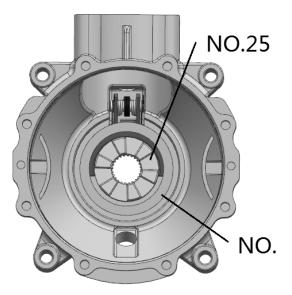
8.Install the differential assembly into the carrier housing. \rightarrow Fig 17
